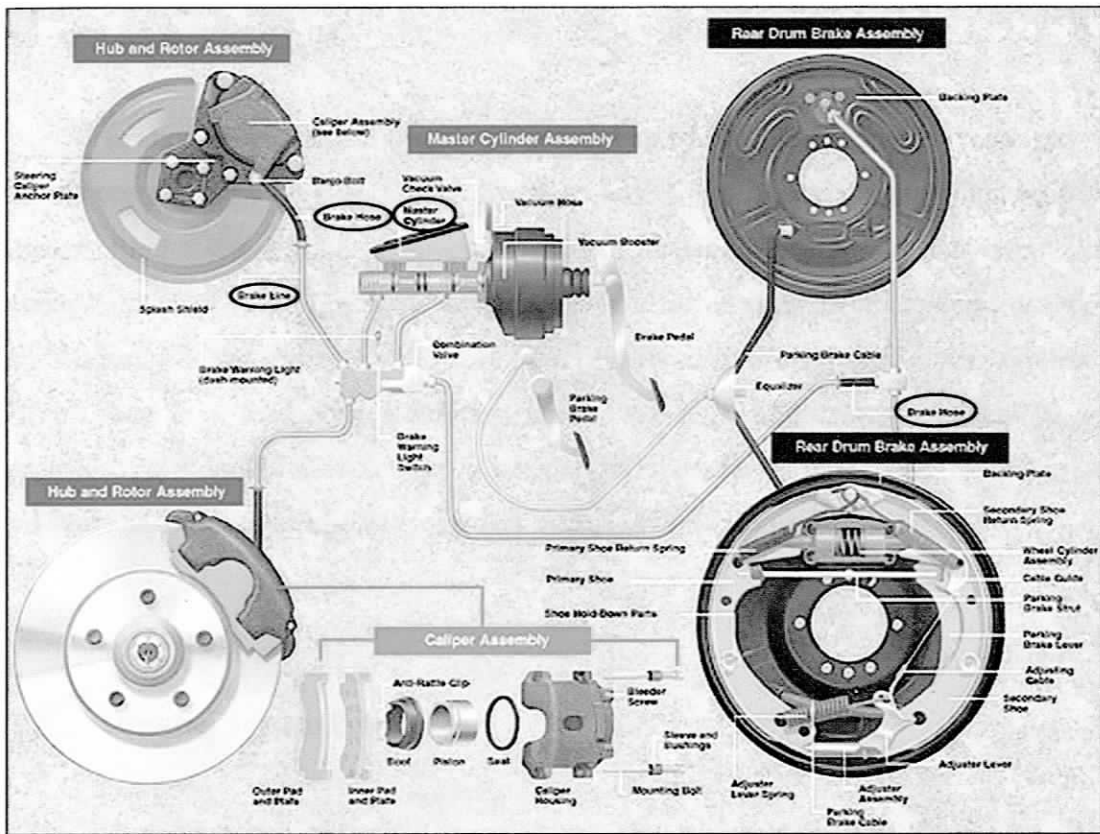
Example of a typical hydraulic disc/drum brake system [9]
